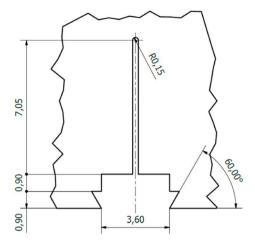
SENB fracture specimens D11 to D16 (see Table 3). Dimensions in mm.
